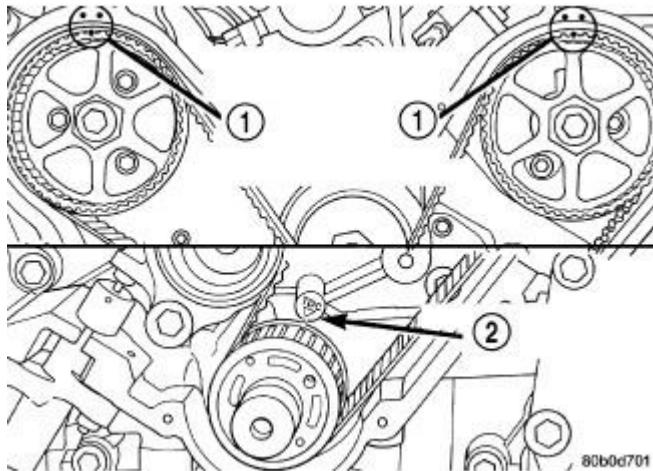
CAMSHAFT SPROCKET TIMING MARKS
